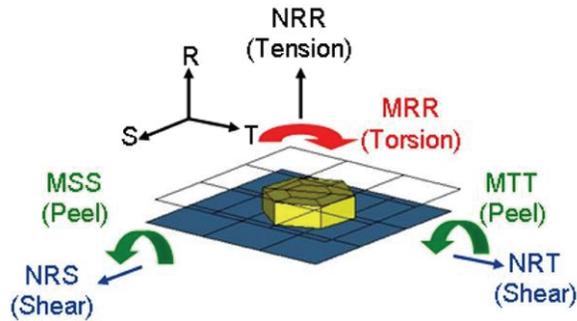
A single weld assembly illustrating the directions of the failure criteria.
